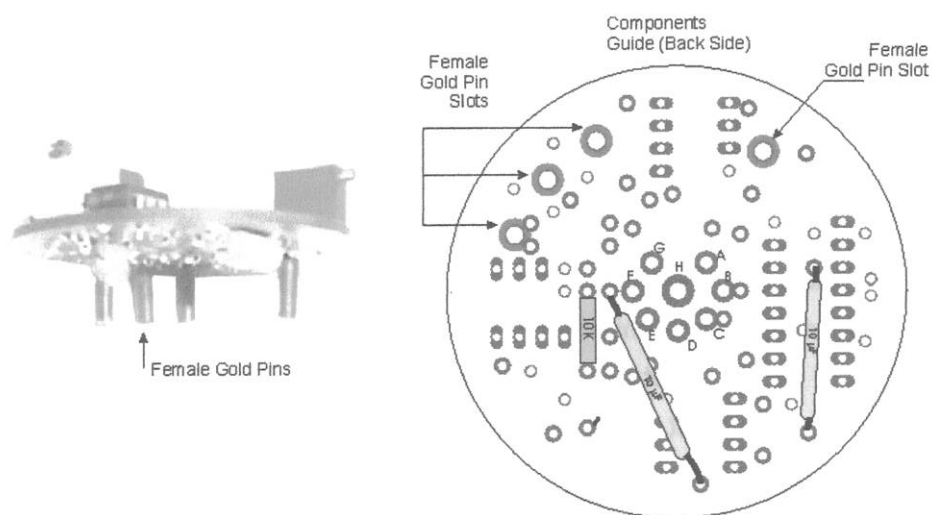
Assembly of components on the front side of the BF-10 board
